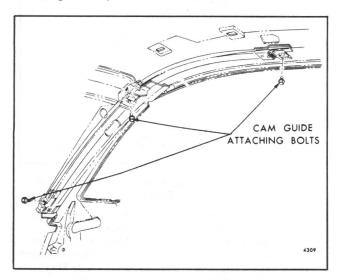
Tailgate Window Left Guide Cam Attachment
